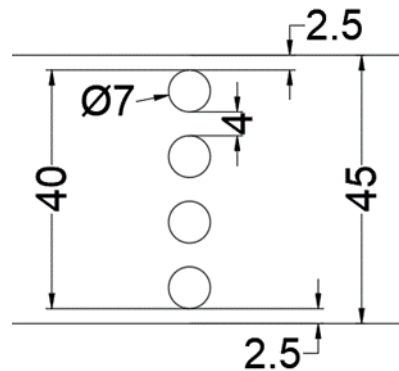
Dimensions of the Dimple features (All dimensions are in mm)
